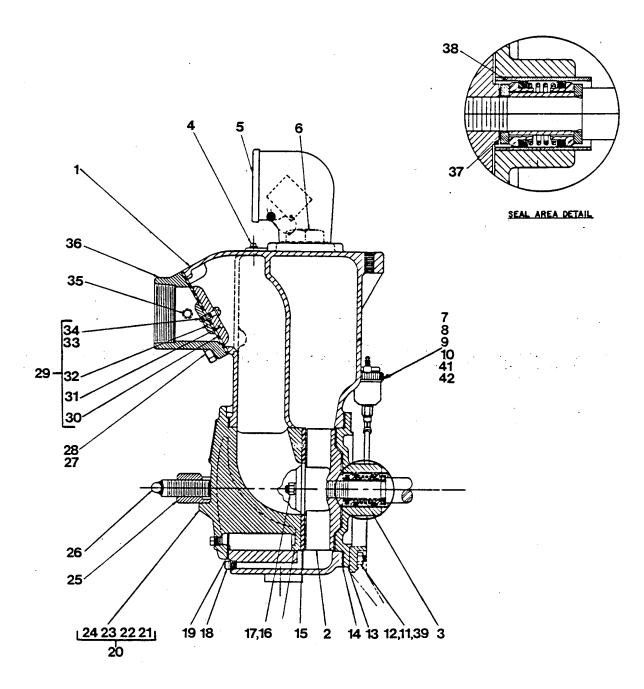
Pump End Assembly Model 13A2-ST1 S/G
